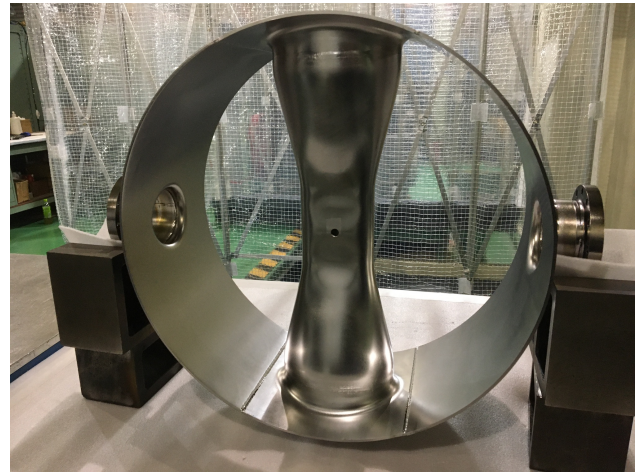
The body assembly of the prototype spoke cavity fabricated in fy2021.
